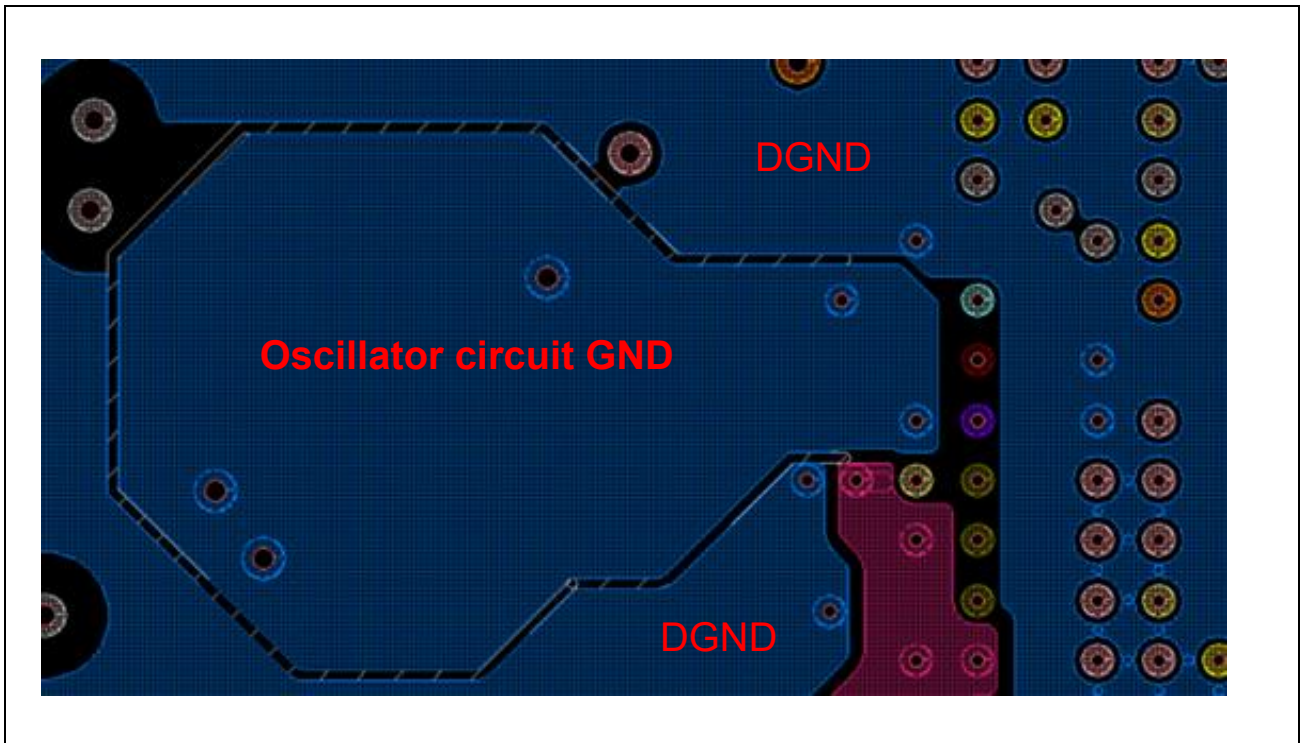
Example layout of the second layer (Layer2) of the PCB
